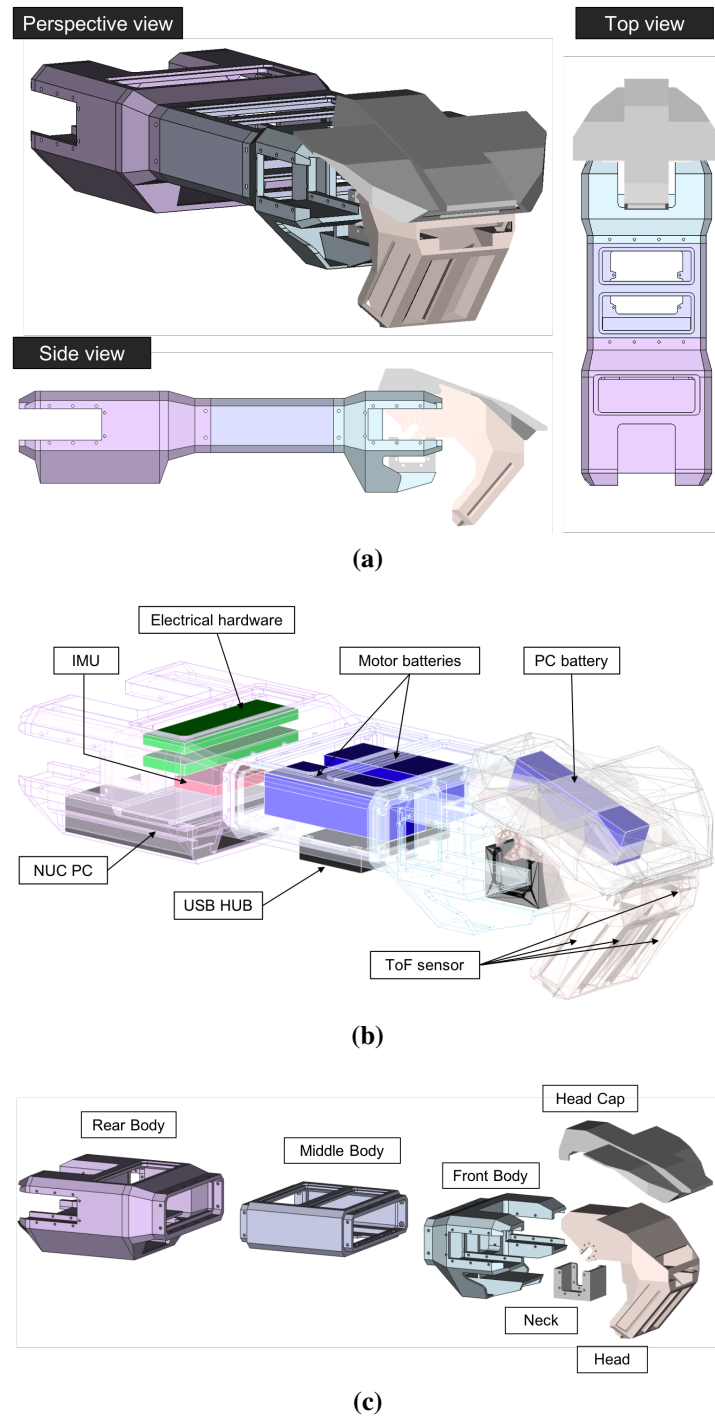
The robot body (torso and head). (a) Orthographic projections. (b) Interior hardware placements. (c) Exploded parts.
